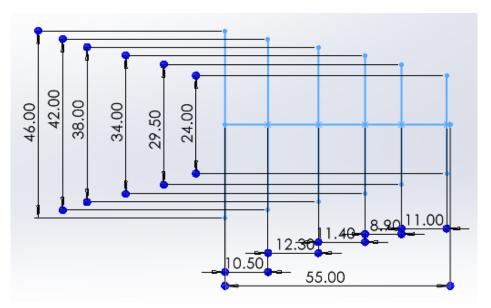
Caliper Measurements of the Printed Lower Jaw.
